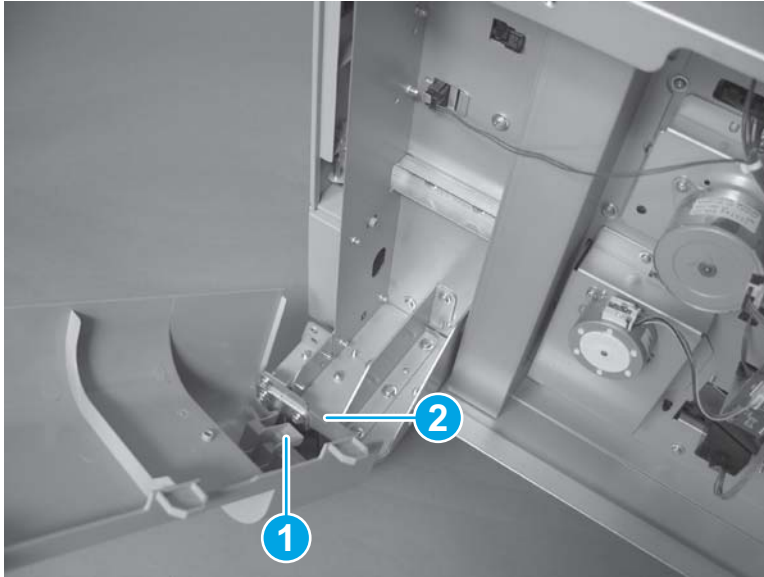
Remove the HCI, 1x500, and 3x500 right rear cover (4 of 4)
